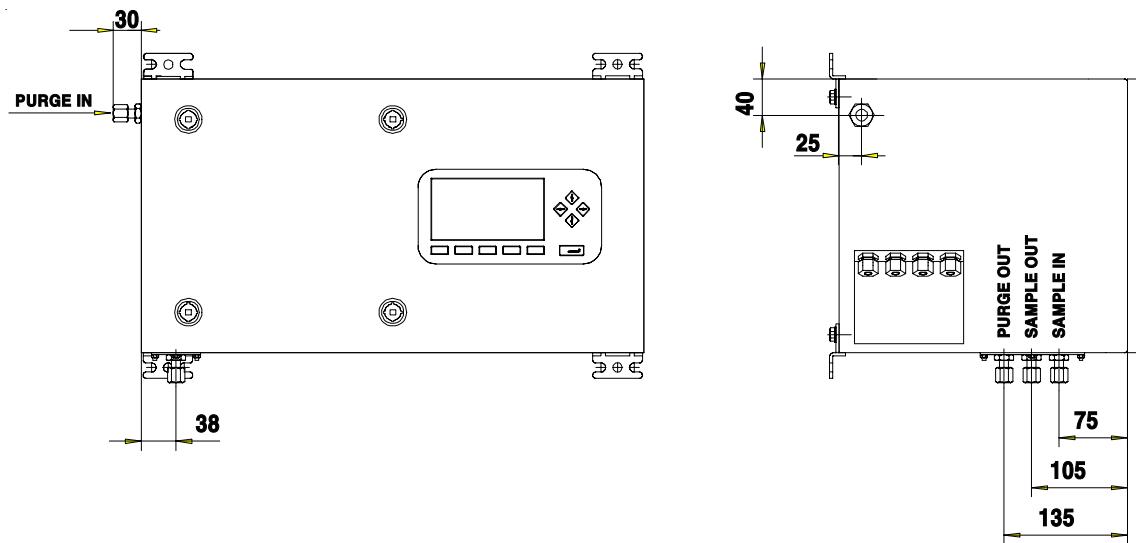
Dimensional sketch MLT 2 for Ex Zone 1 in standard housing [all dimensions in mm]
